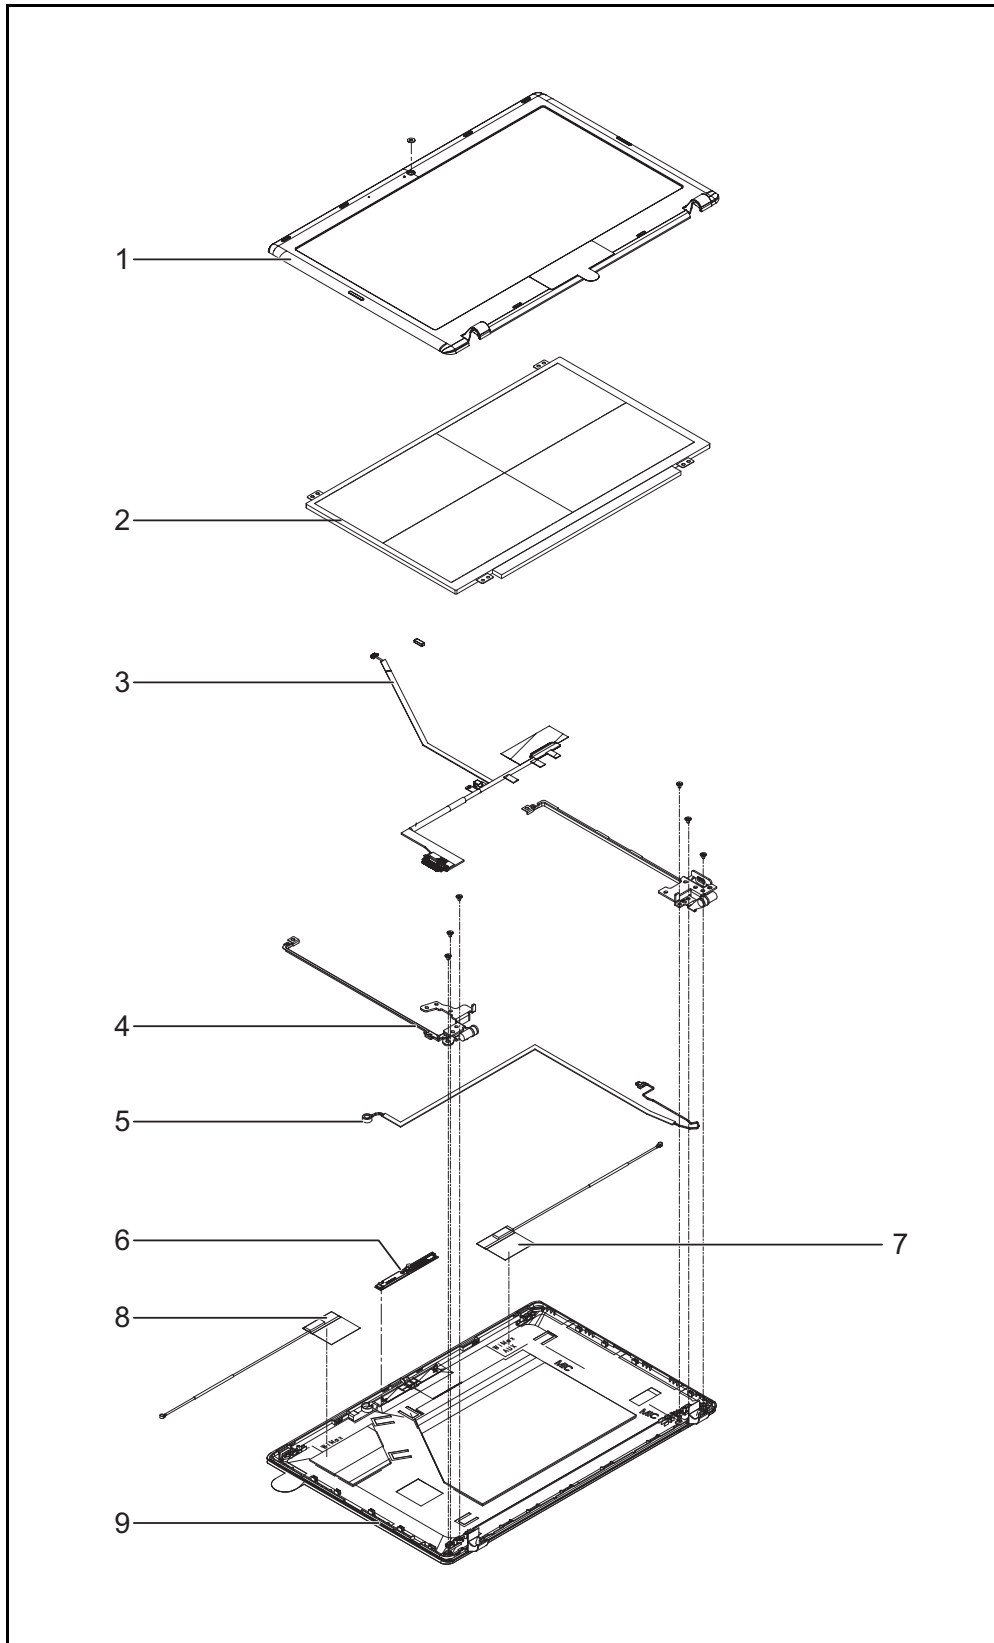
Upper Case Assembly Exploded Diagram
